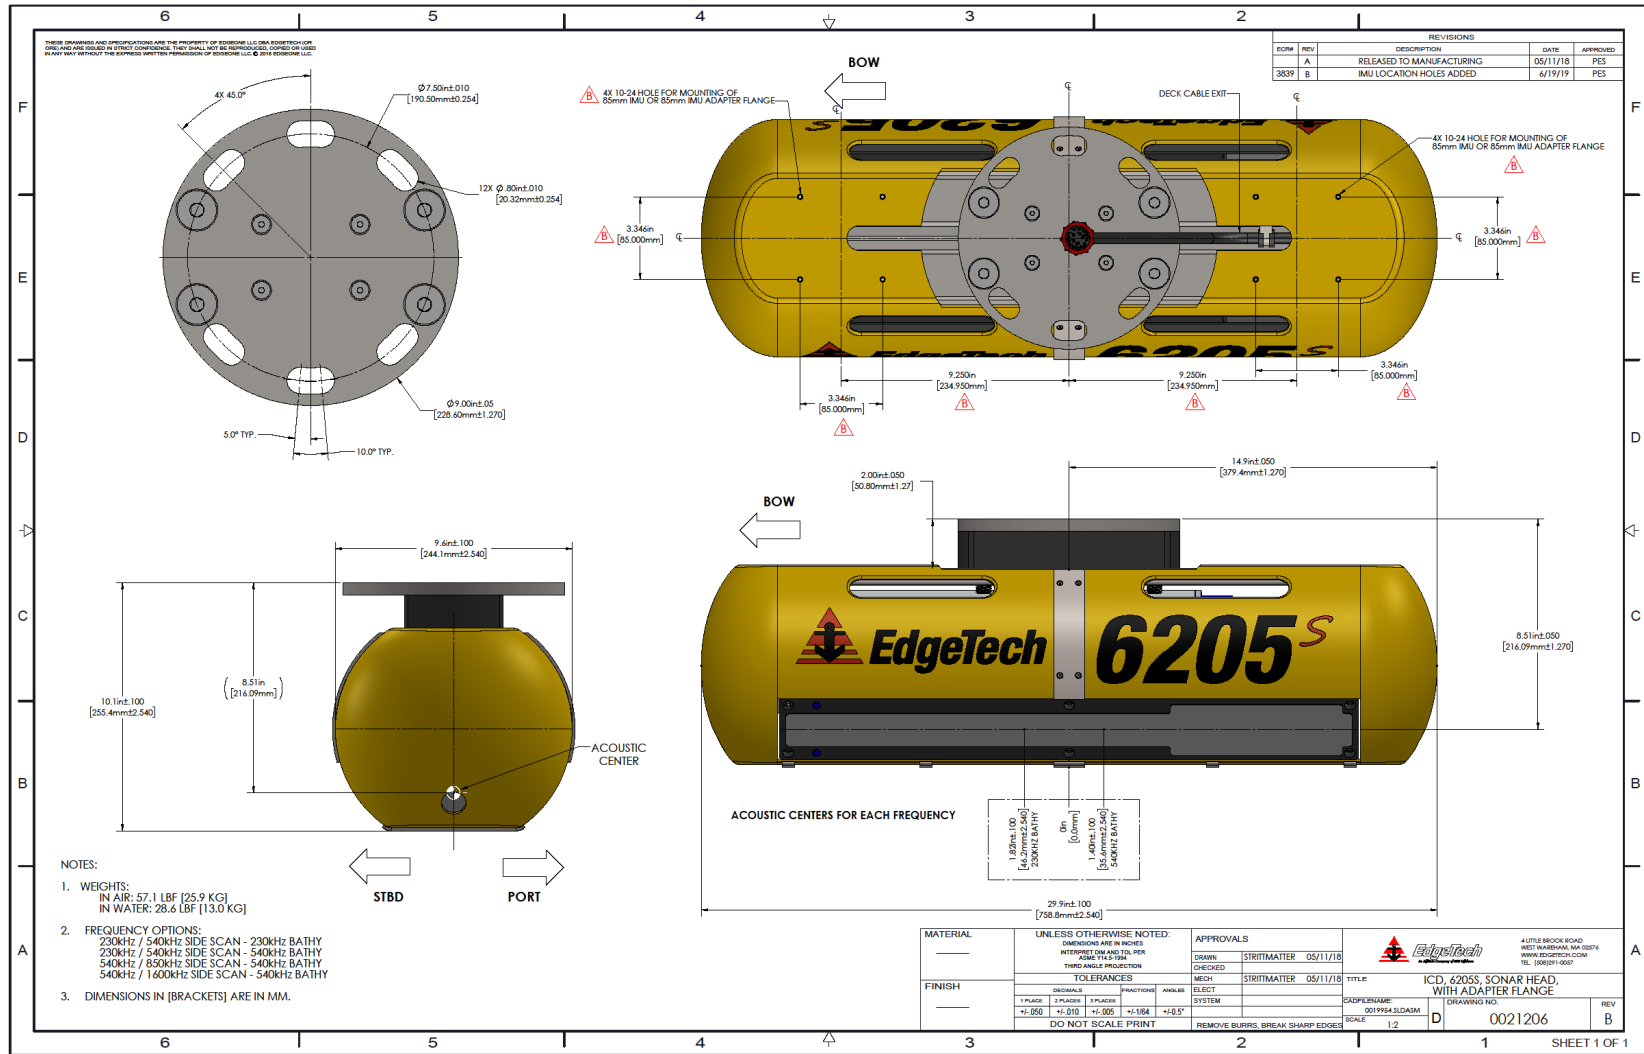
Acoustic Center Location in X, Y, and Z Dimensions and Bolt Pattern with Adaptor Flange – 0021206
